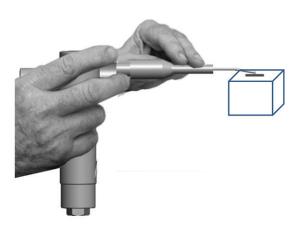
Operator working position - Angle reciprocating polishing/filing machine with tool for two-handed operation
